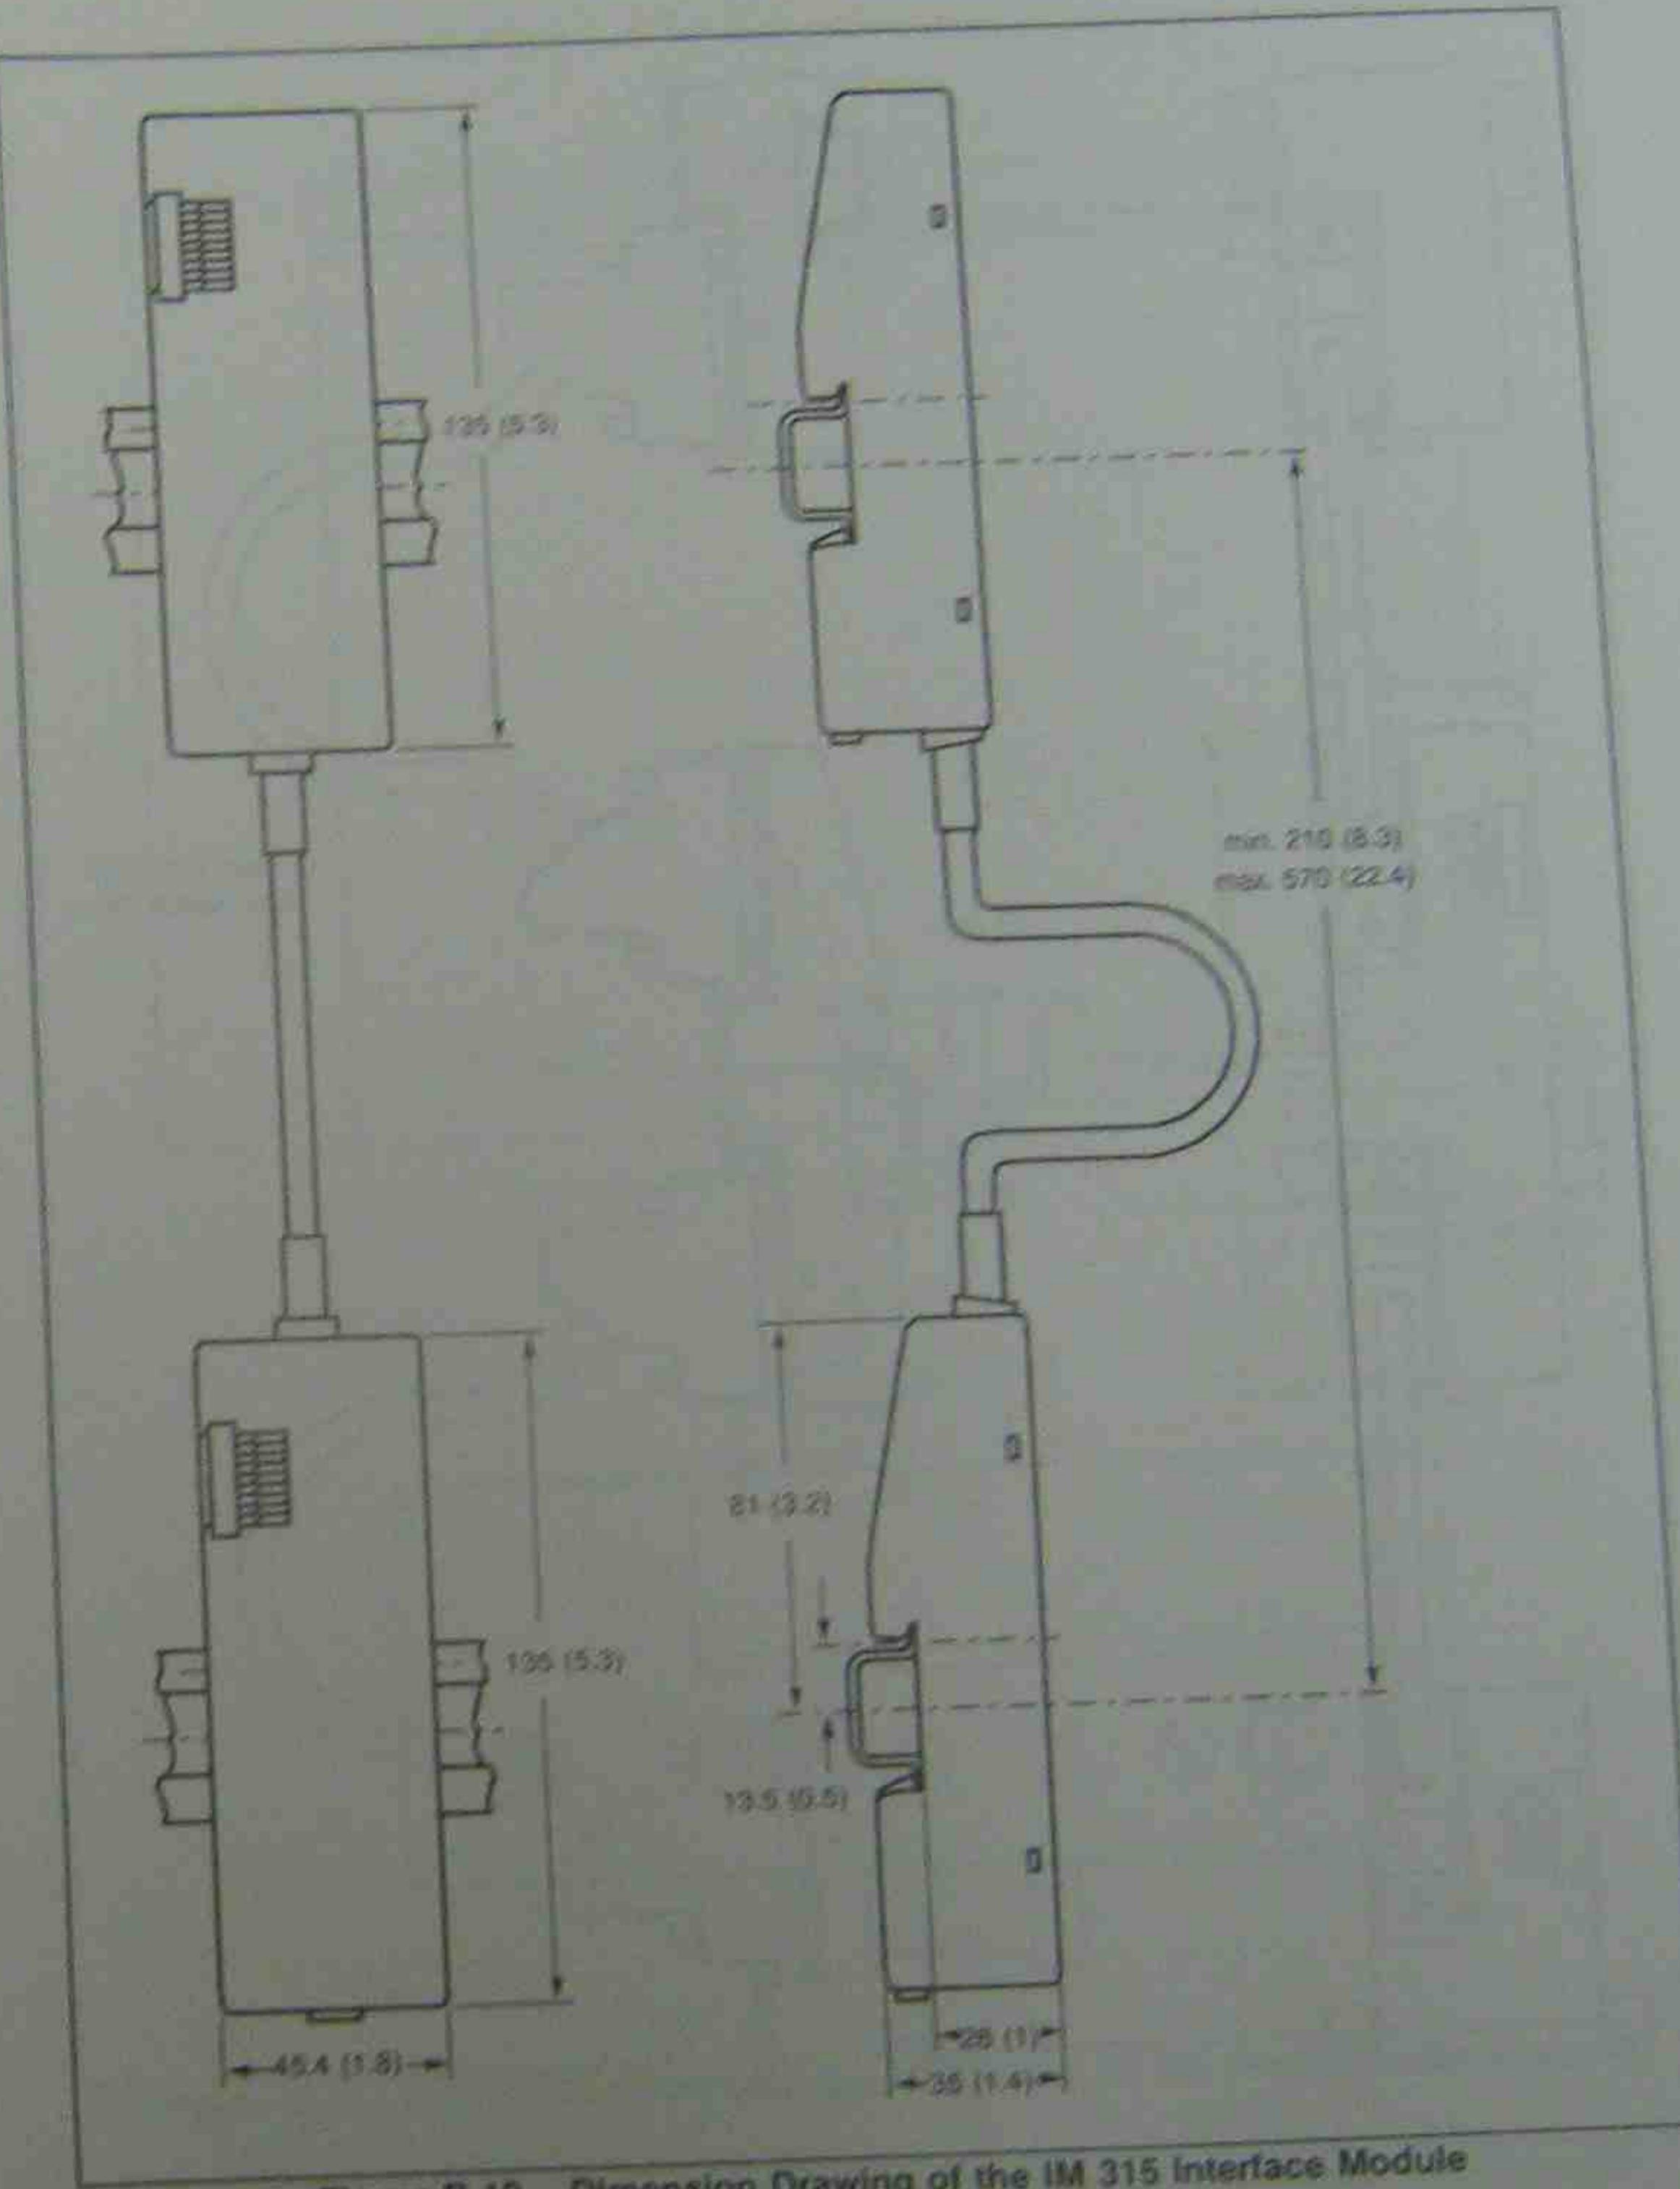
Dimension Drawing of the IM 315 Interface Module
